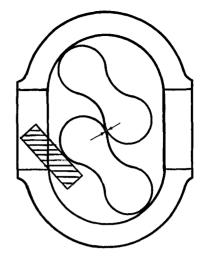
ROTOR AND SPACER BLOCK POSITION FOR INDEXING GEARS (AS VIEWED FROM GEAR END)
